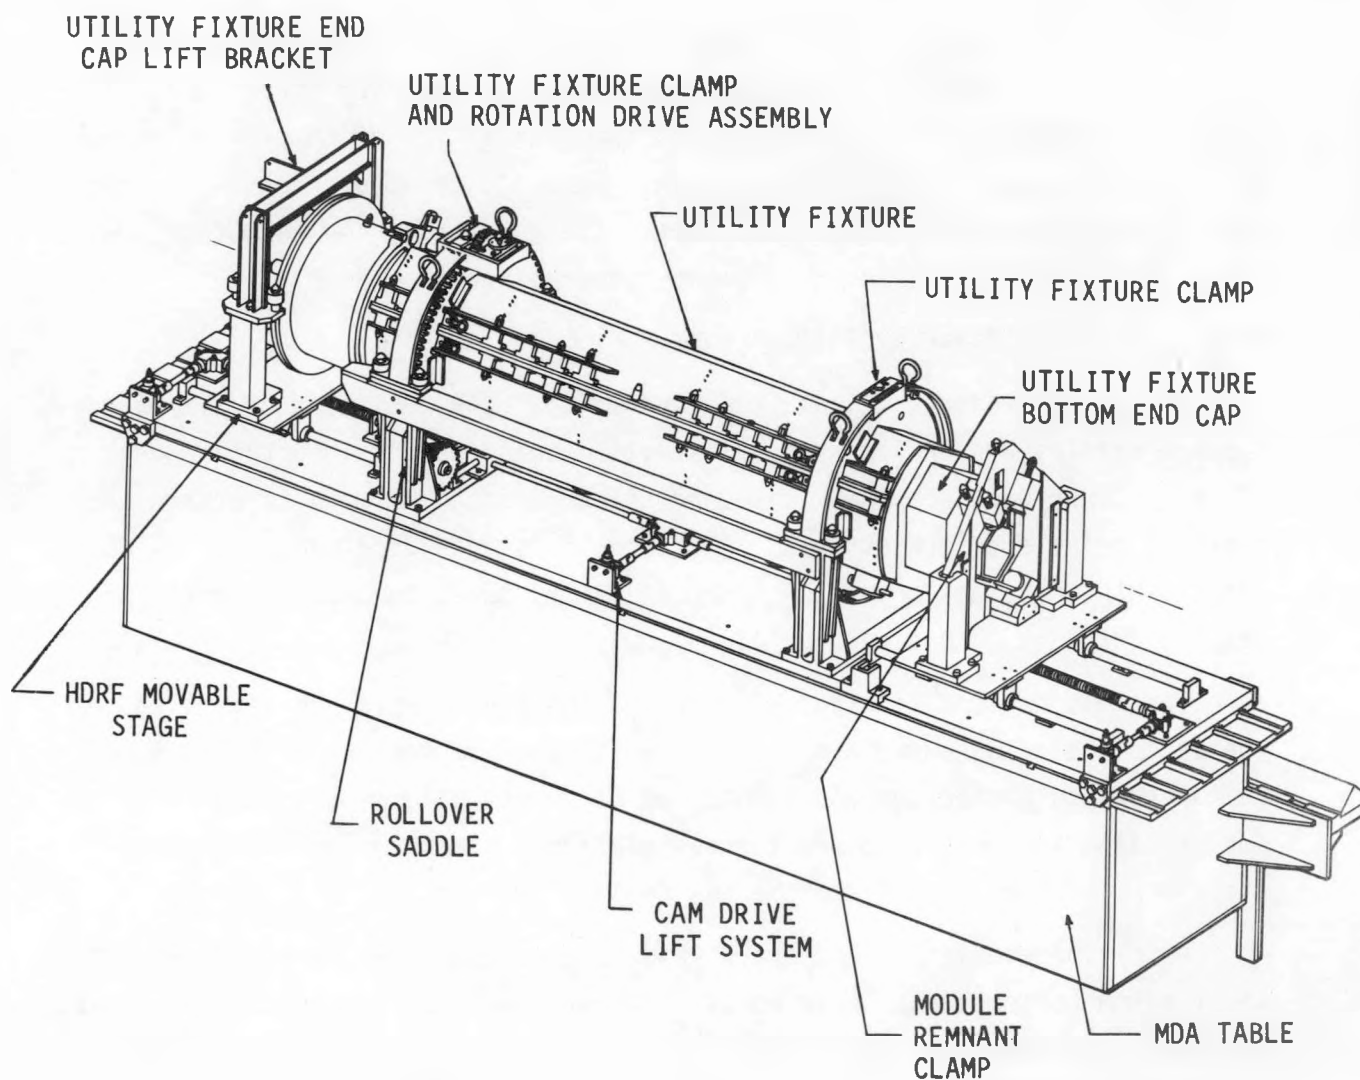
LWBR Holddown and Rotation System Assembly
